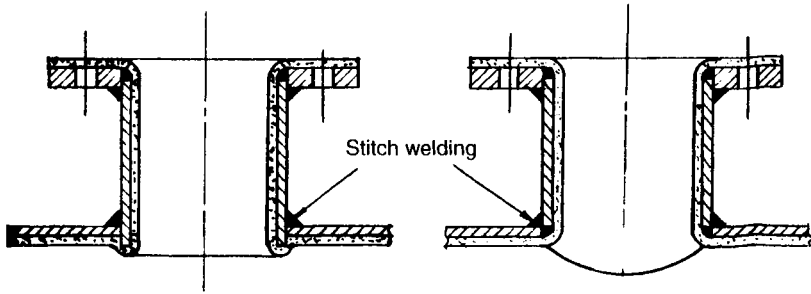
Outward rubber lining projection and stitch welding. Rubber lining is shown in dotted lines.
